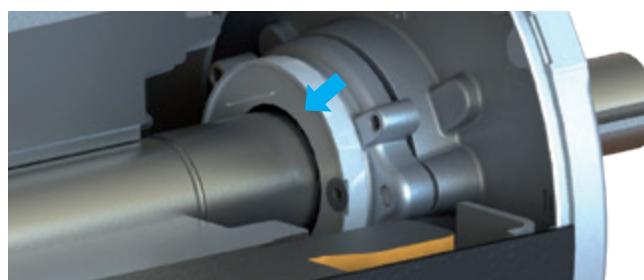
AEGIS® grounding brush installed on the bearing cap.
